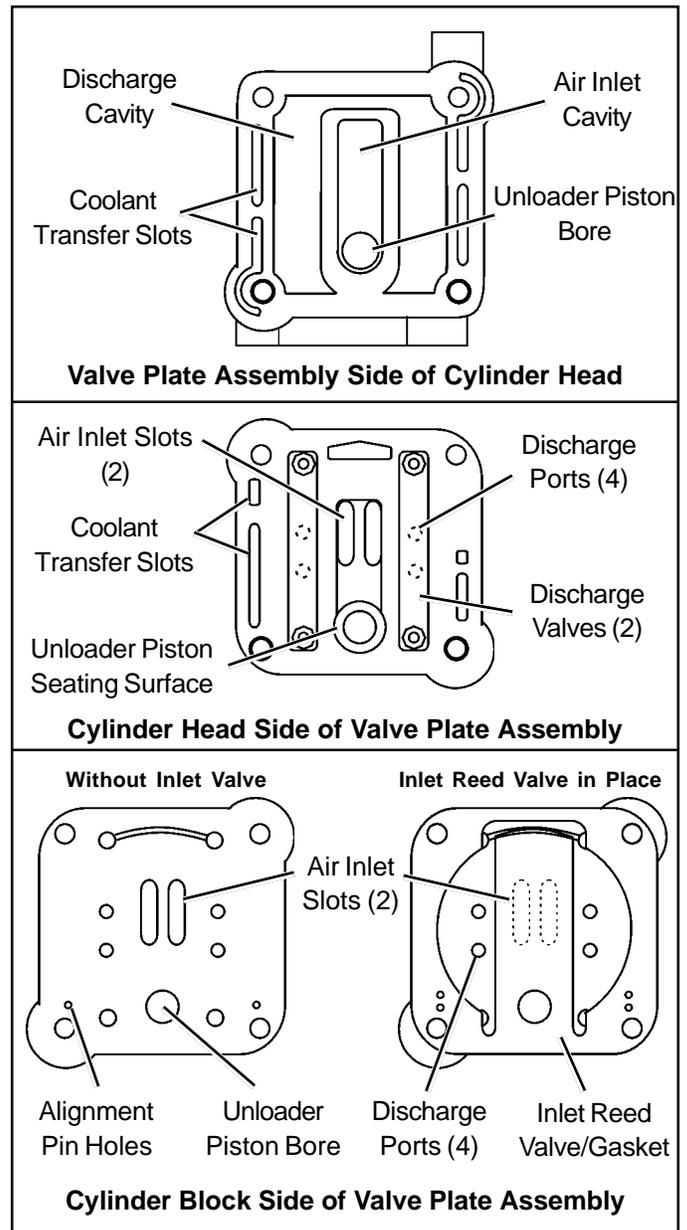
CYLINDER HEAD AND VALVE PLATE ASSY.
